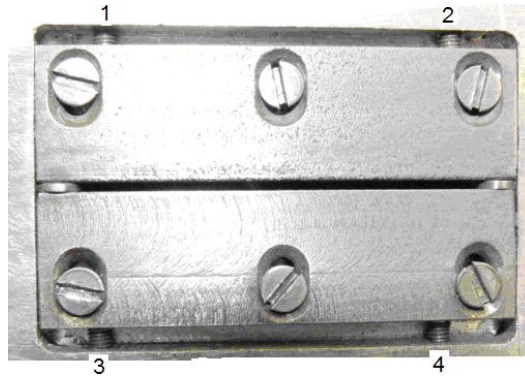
Figure III : A picture of the bottom part of the flame gap in the PRSA. This part is placed inside the primary chamber. The numbers 1-4 illustrates screws that are tightened with a torque of 20 cNm, which is the same torque as the upper part of the flame gap is tightened with. The distance bits can be seen on each side of the gap opening.
